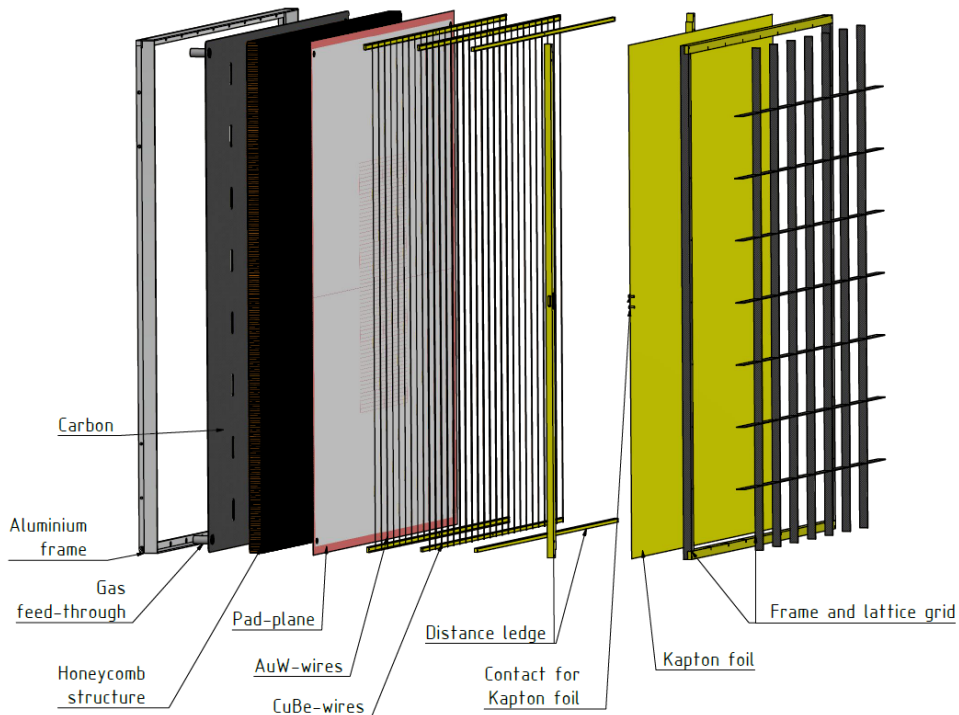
An exploded-view drawing of the CBM-TRD MWPC with visible layers. A particle would move through the module from right to left. [TDR18].
